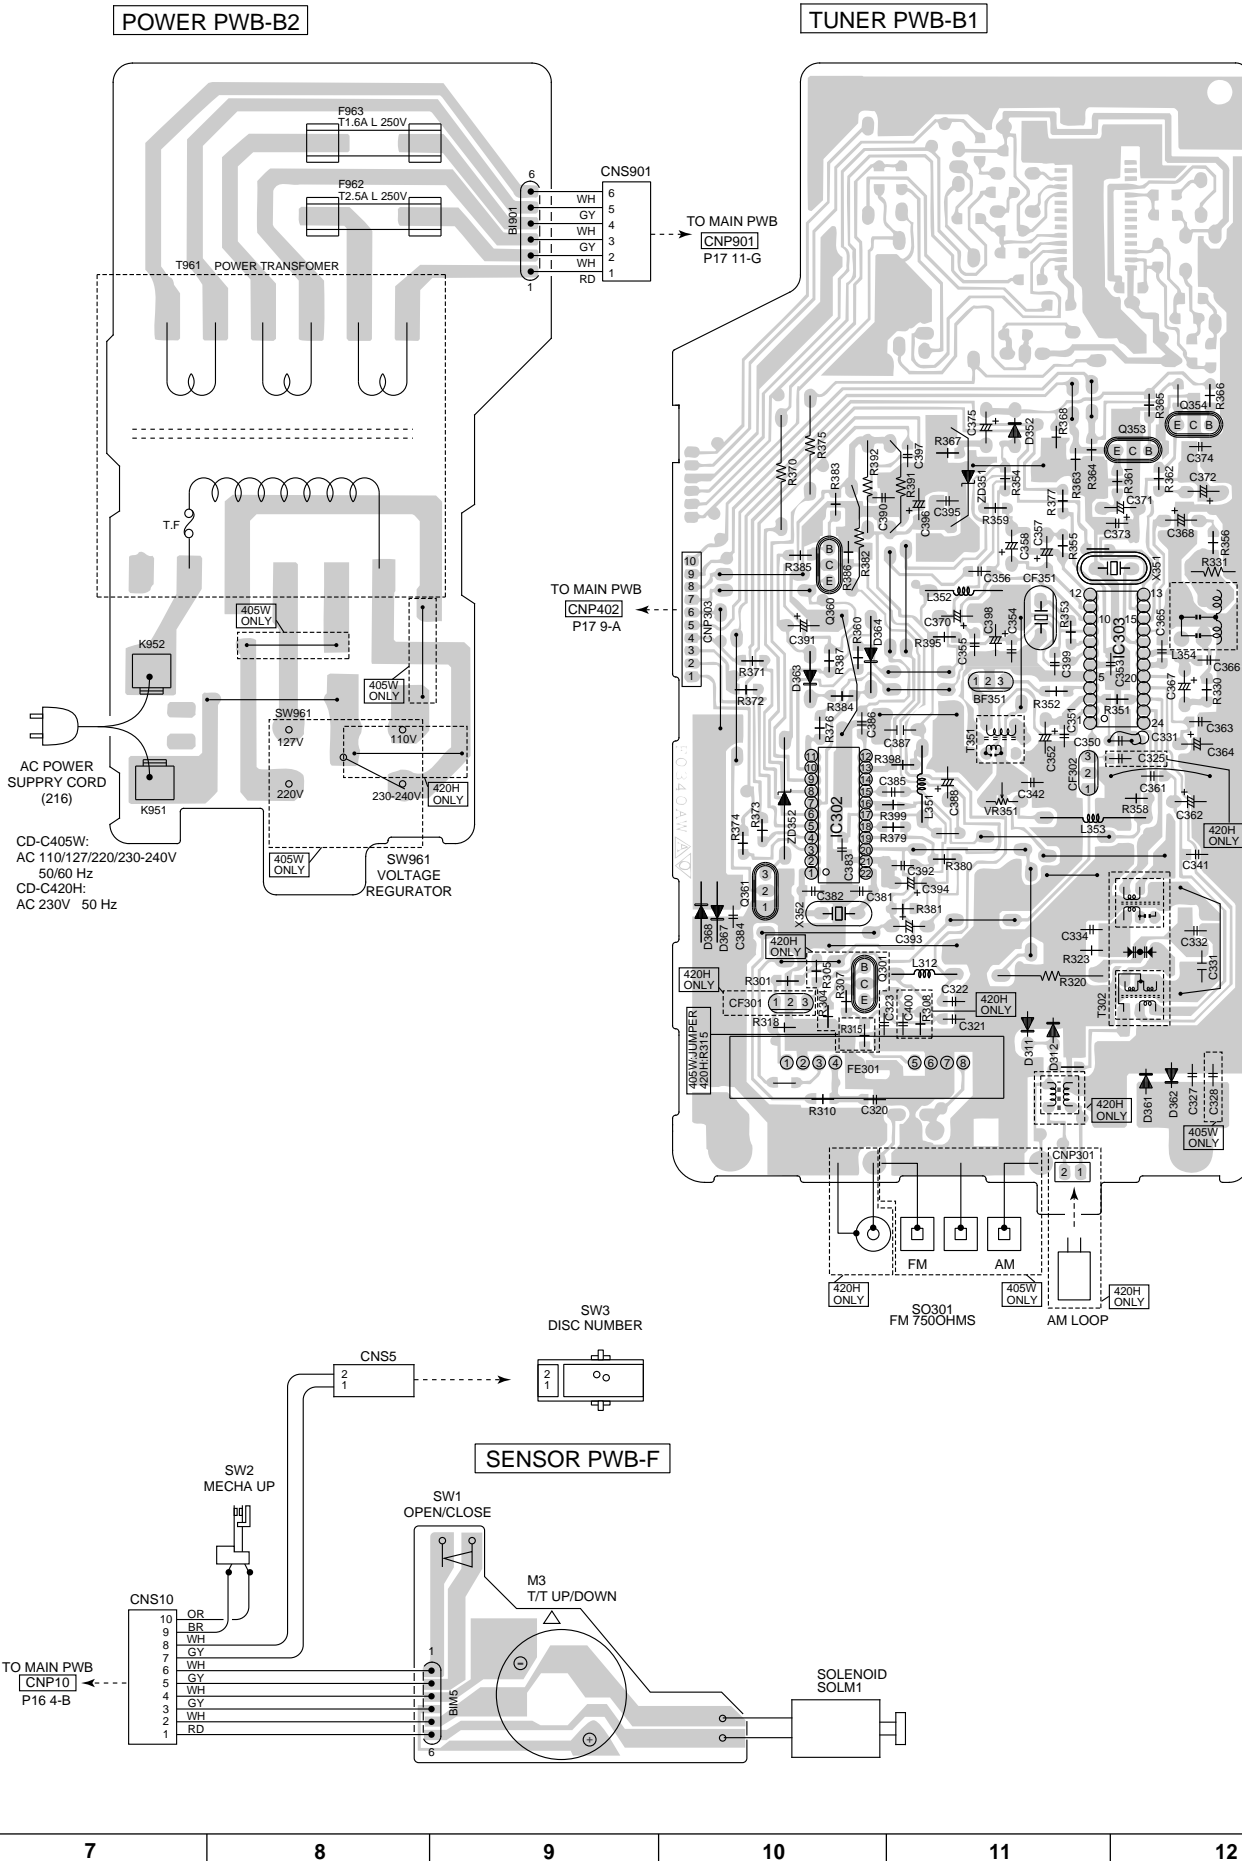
WIRING SIDE OF P.W.BOARD (4/4)
